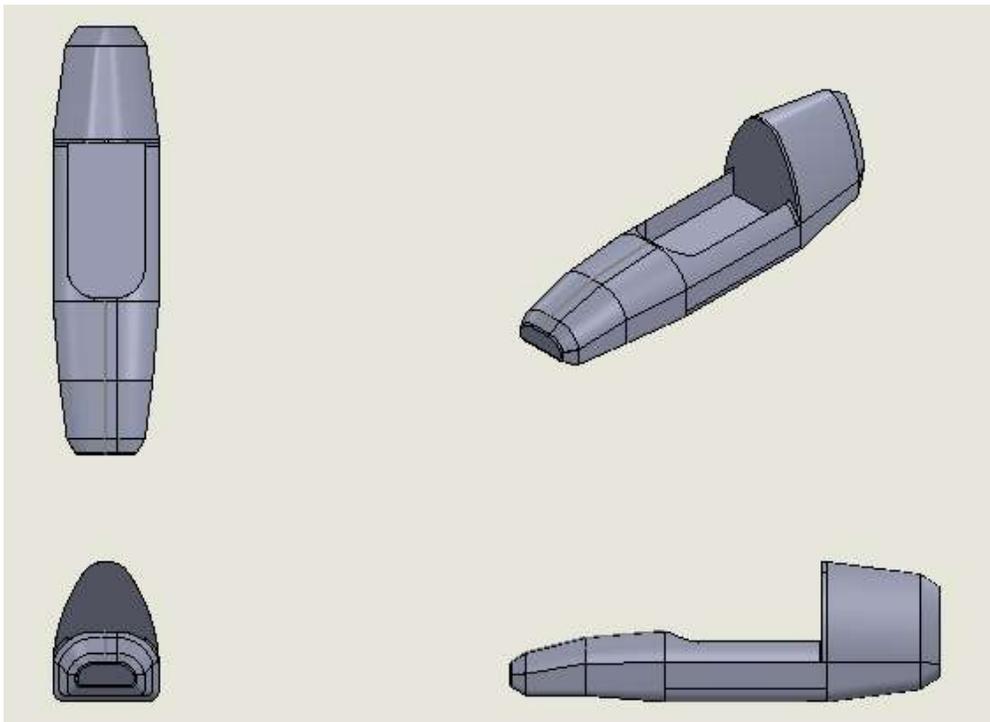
Preliminary front end redesign components and driver cabin enlargement
